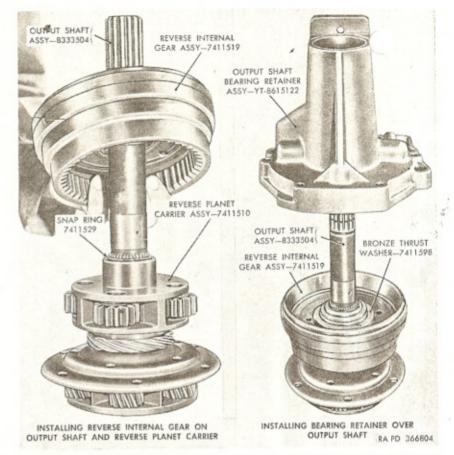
Installing reverse internal gear assembly and output shaft bearing retainer on output shaft.
